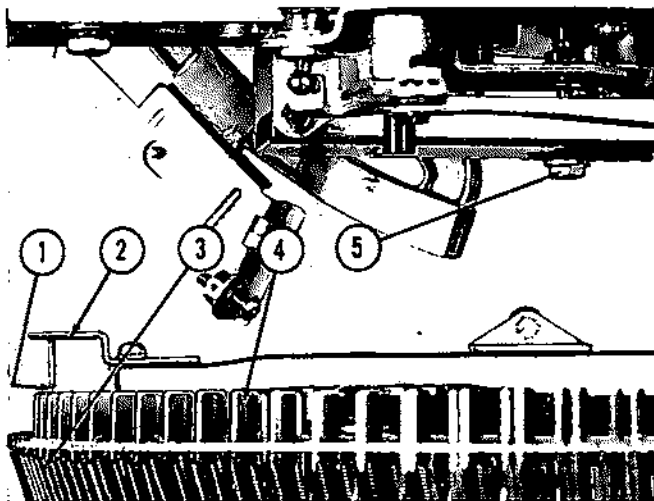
SELECTOR CRANK CLEARANCE ADJUSTMENT
